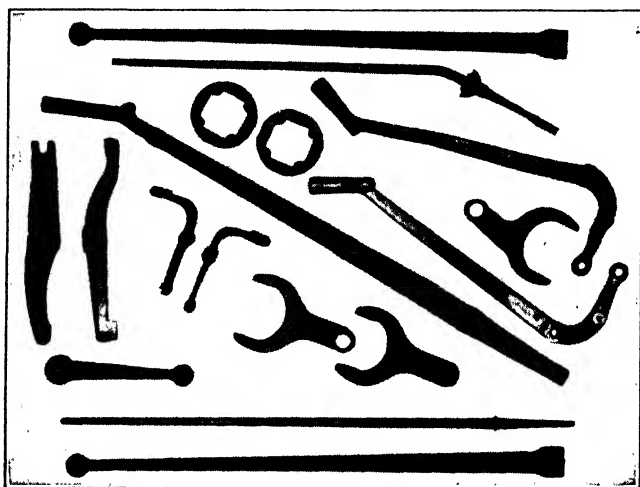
A group of automotive drop forgings including also two malleable castings, on all of which bosses or other surfaces are coined to size, displacing machining or grinding operations.
